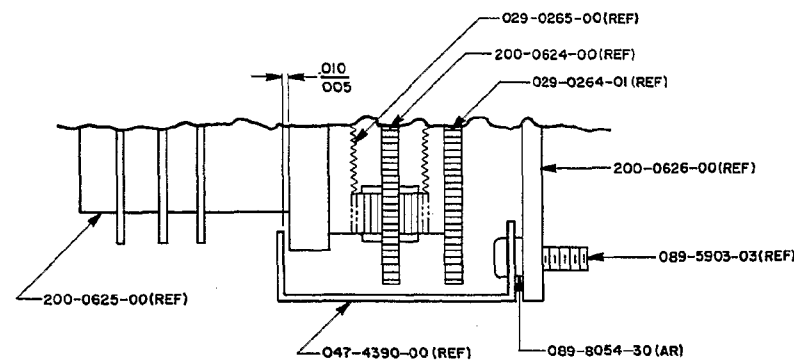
KI 525A FRONT DISPLAY ASSEMBLY
